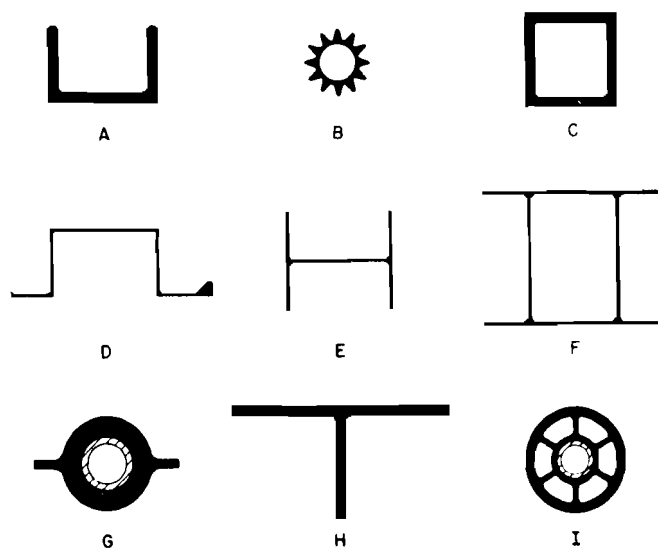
BERYLLIUM SHAPES EXTRUDED BY FILLED-BILLET METHOD⁽⁴³⁾
